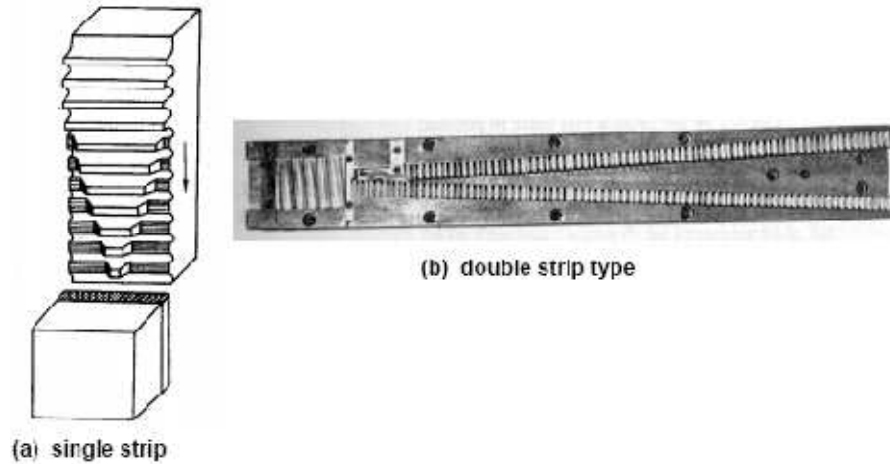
Progressive cut type broaches; (a) single bar and (b) double bar type
